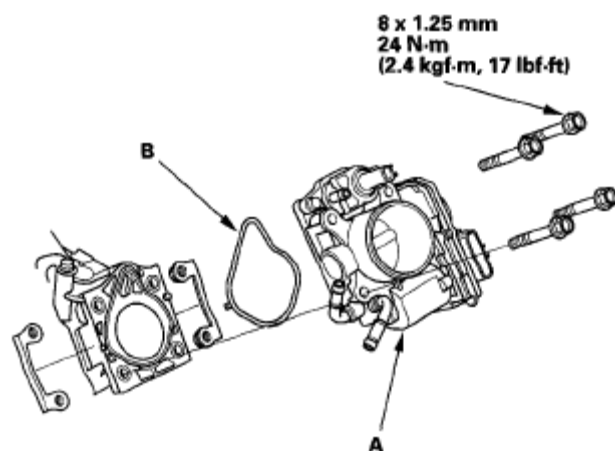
Identifying Throttle Body And Gasket (With Torque Specifications)
